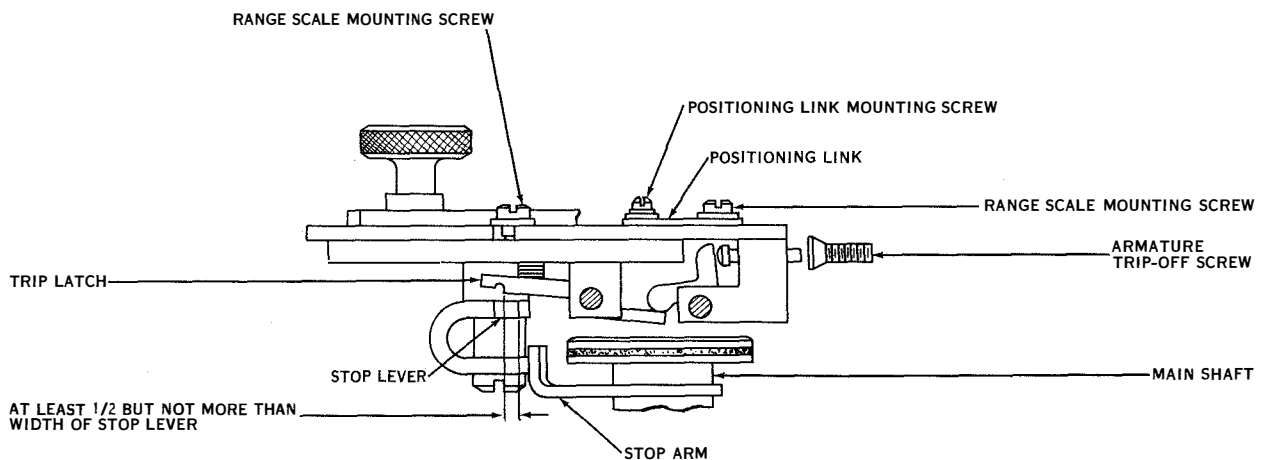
Selector Stop Arm and Stop Lever Engagement Positioning Link
